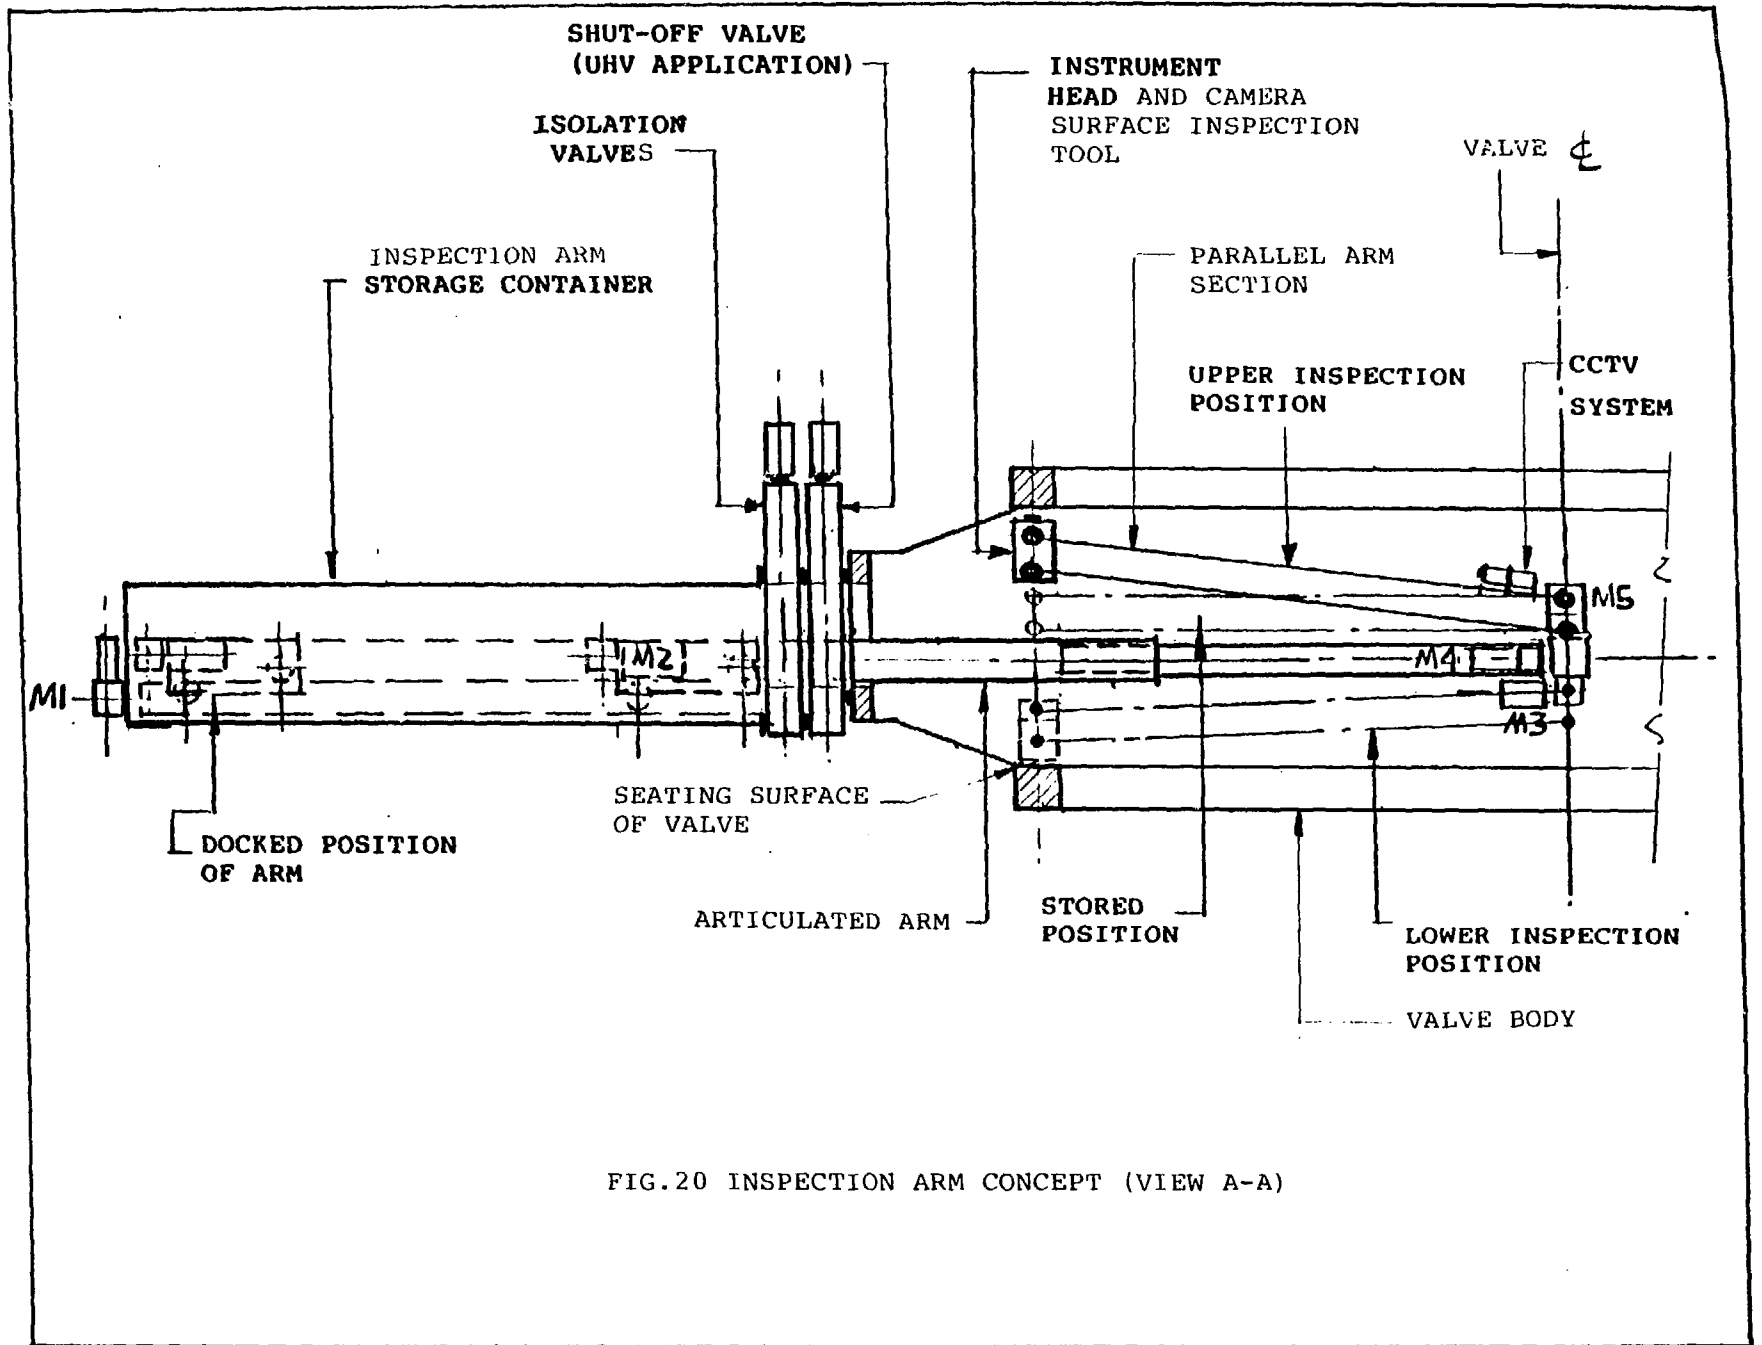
INSPECTION ARM CONCEPT (VIEW A-A)
